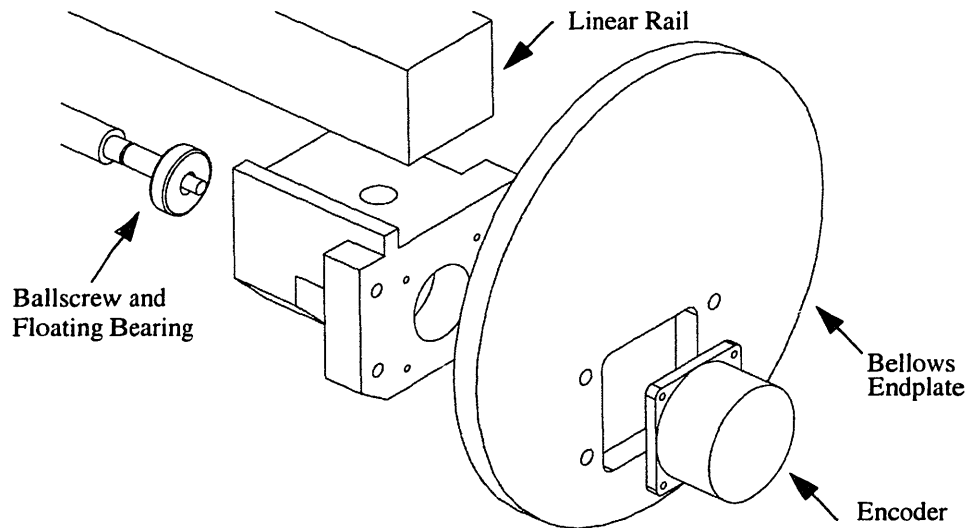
Exploded View of Y-Axis Encoder Mount Bearing Block Assembly
